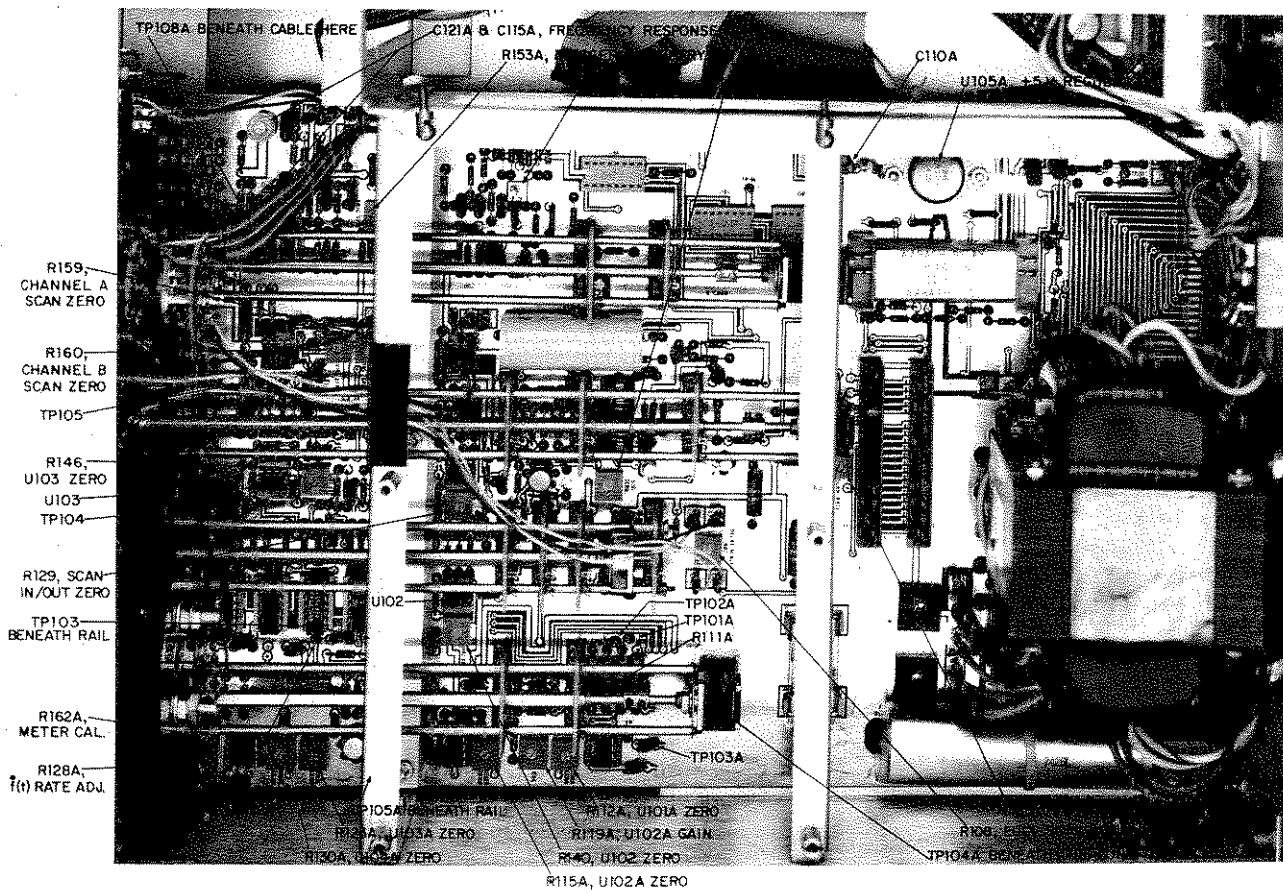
LOCATION OF MODEL 162 LOWER BOARD ADJUSTMENTS AND TEST POINTS
